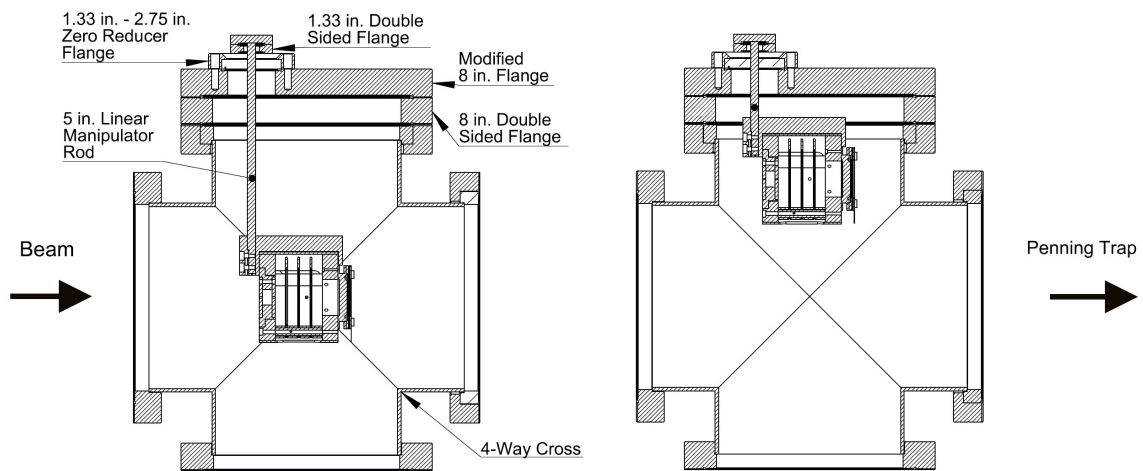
Sidecut drawing view of TITAN RFA setup installed in a 8 inch four-way cross. Left: RFA extended into the four-way cross for beam measurements. Right: RFA retracted from beam, enabling an unperturbed flow pass the detector. An 8 inch double sided flange is employed to create sufficient space to fully retract the RFA from view of the incoming ion beam. Electrical connections are not shown.
